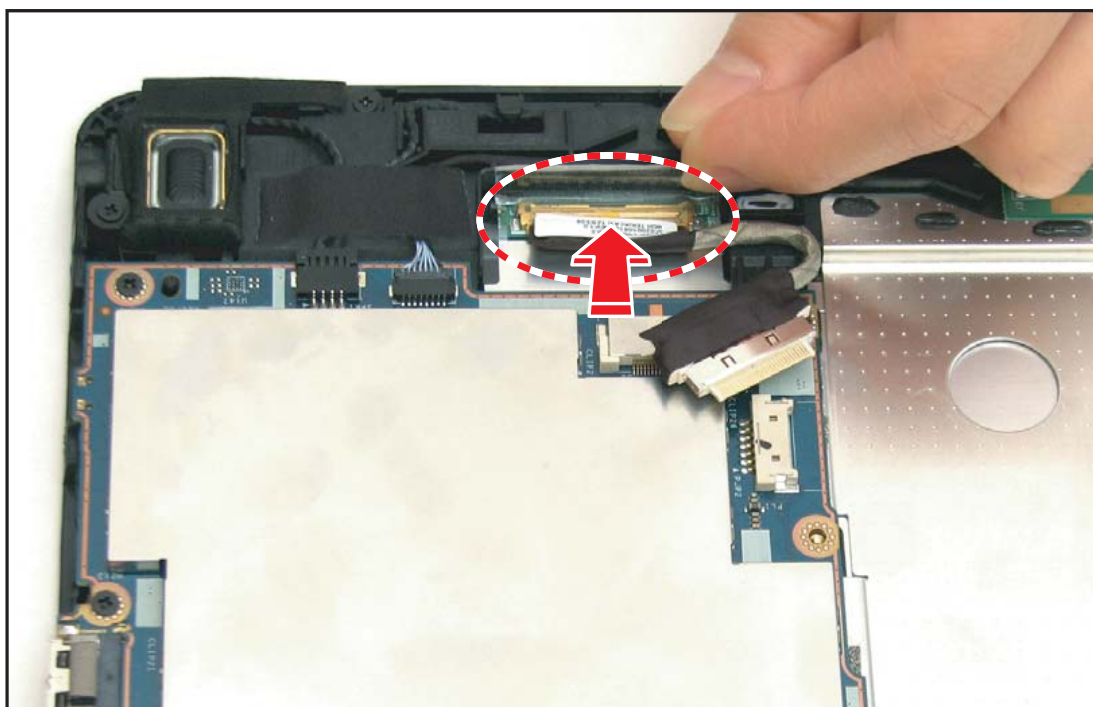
Connecting the LVDS Cable (1 of 2)
